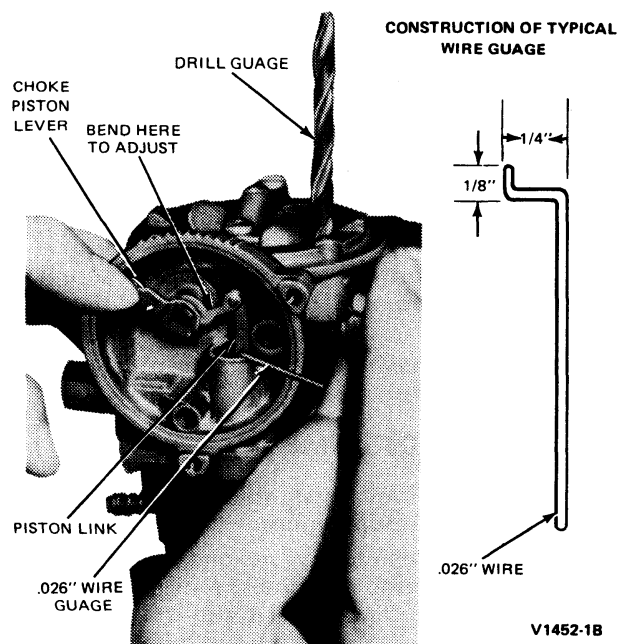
Pulldown Clearance Adjustment—Model YFA 1-V Carburetor
